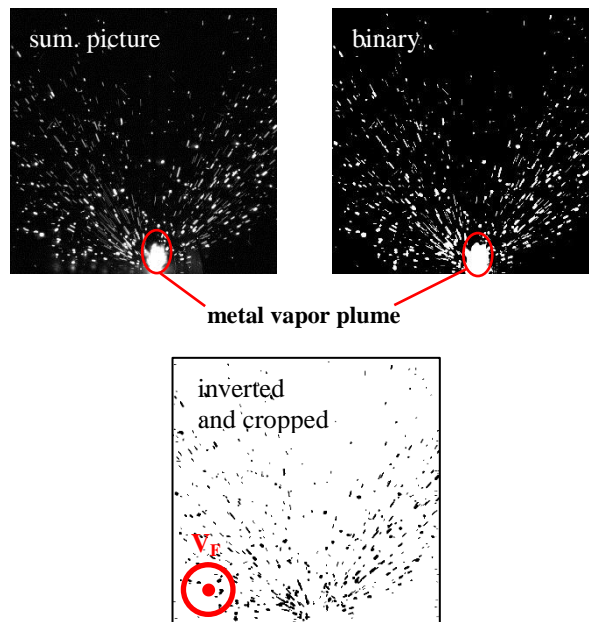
Superposition of multiple frames to a summarized picture of the welding process by the means of sinusoidal laser beam oscillation to display the spatter occurrence; $P_L = 2.5$ kW, $f_y = 100$ Hz, $w_s = 1.5$ mm, $v_f = 4$ m/min, $l = 200$ mm.
